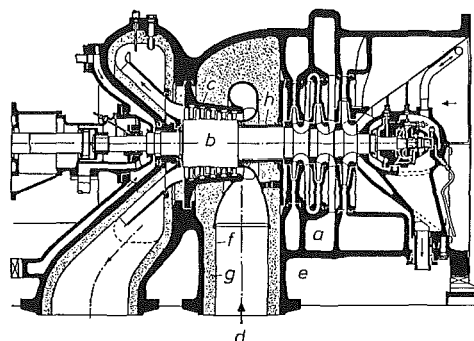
Raheiz turbo set: (a) compressor (three radial stages); (b) turbine (five axial stages); (c) austenitic inner casing; (d) supply of hot air (double-jacket pipe); (e) nonalloyed outer casing; (f) thin-walled, perforated, and austenitic inner pipe; (g) insulation (mineral-wool); (h) annular gap
